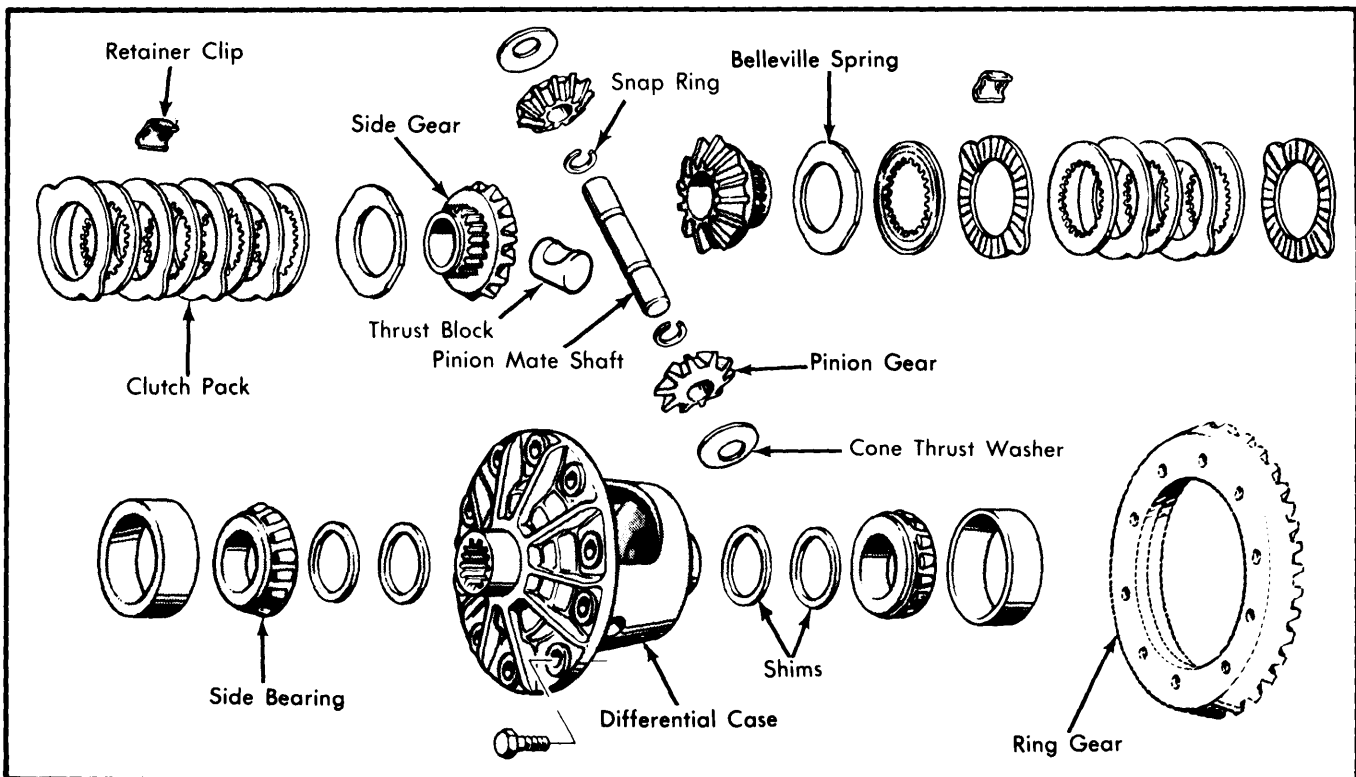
Exploded View of Dana/Spicer Trac-Lok Differential Assembly
